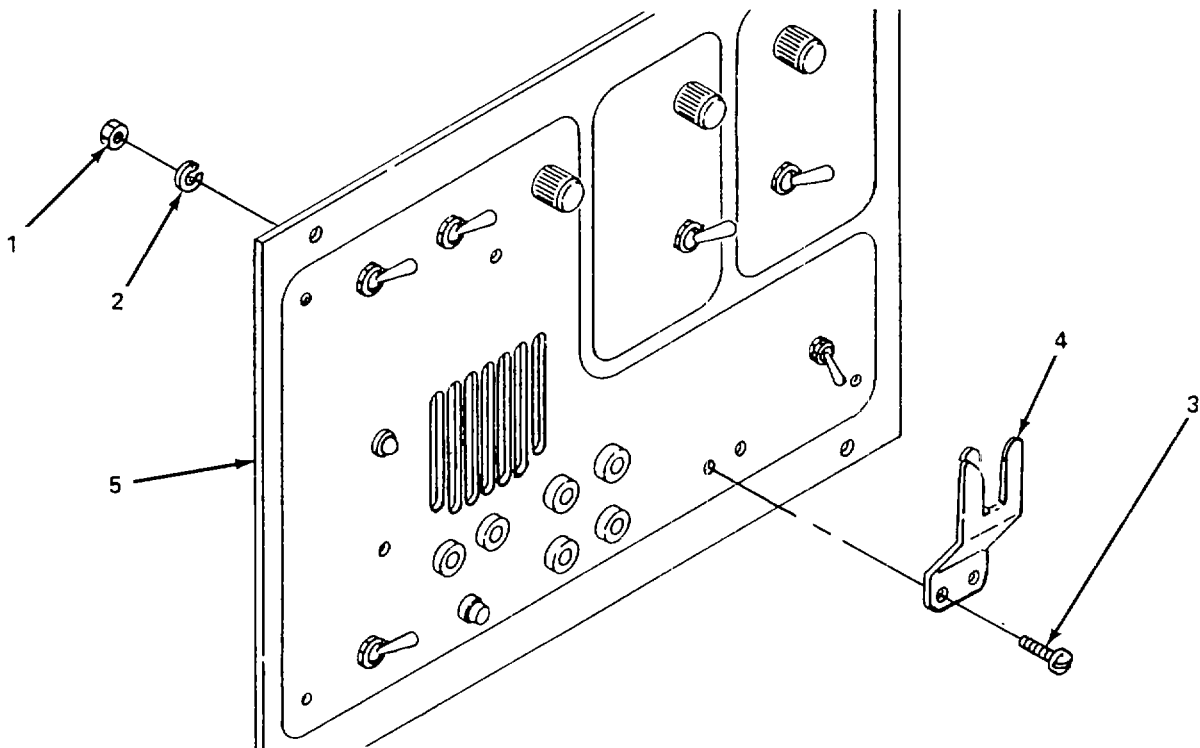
Front Panel Chassis Assembly Microphone Holder, Replace.
